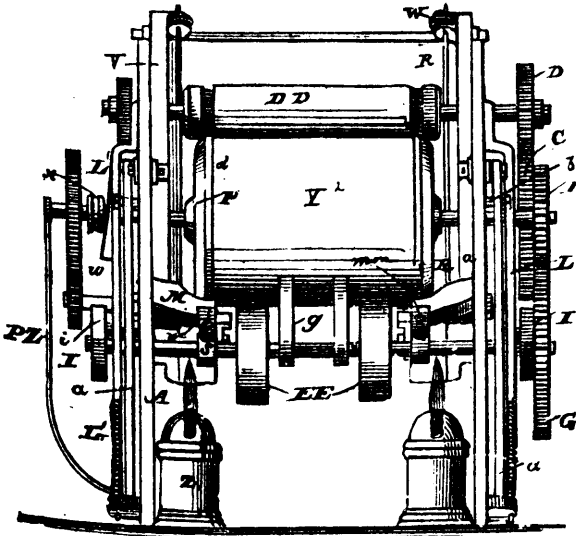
AUTOMATIC SOLDERING MACHINE.
